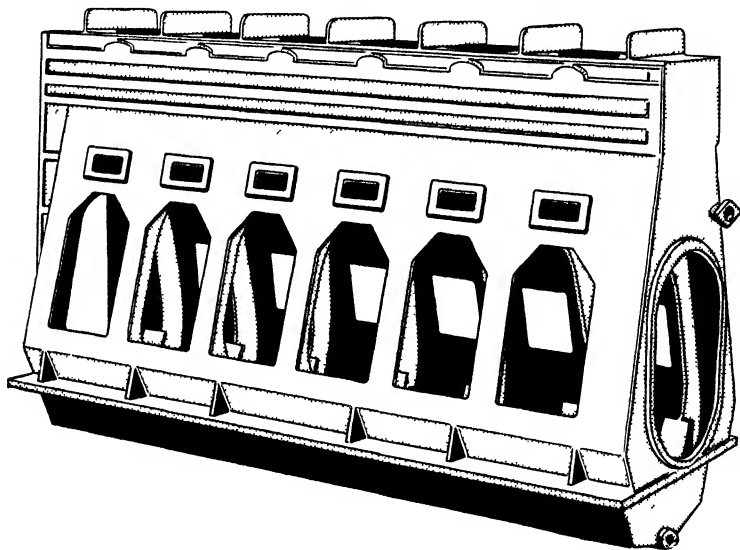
STEVENS WELDED ENGINE.
